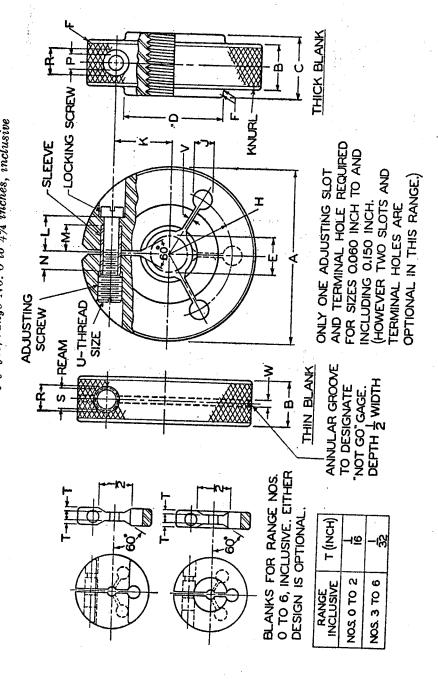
American Gage Design Standard thread ring gages, details of construction—Concluded.
